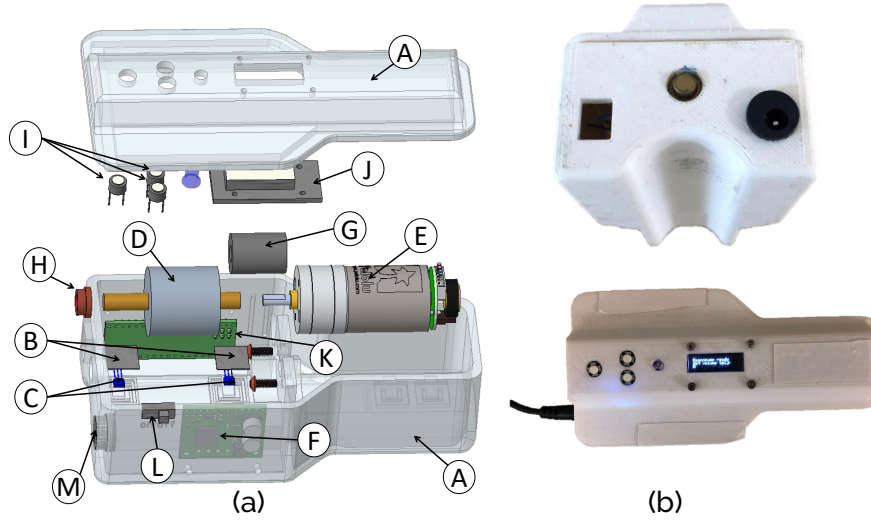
(a): Exploded view of the magnetic external controller (MEC); (b) fabricated MEC, front and top view.
